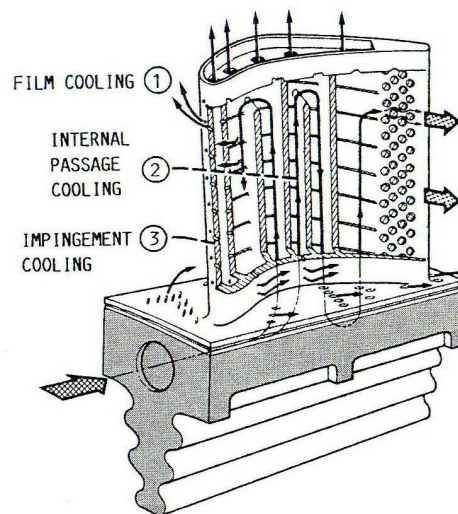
Typical cooled aircraft gas turbine blade of three dimensions.
